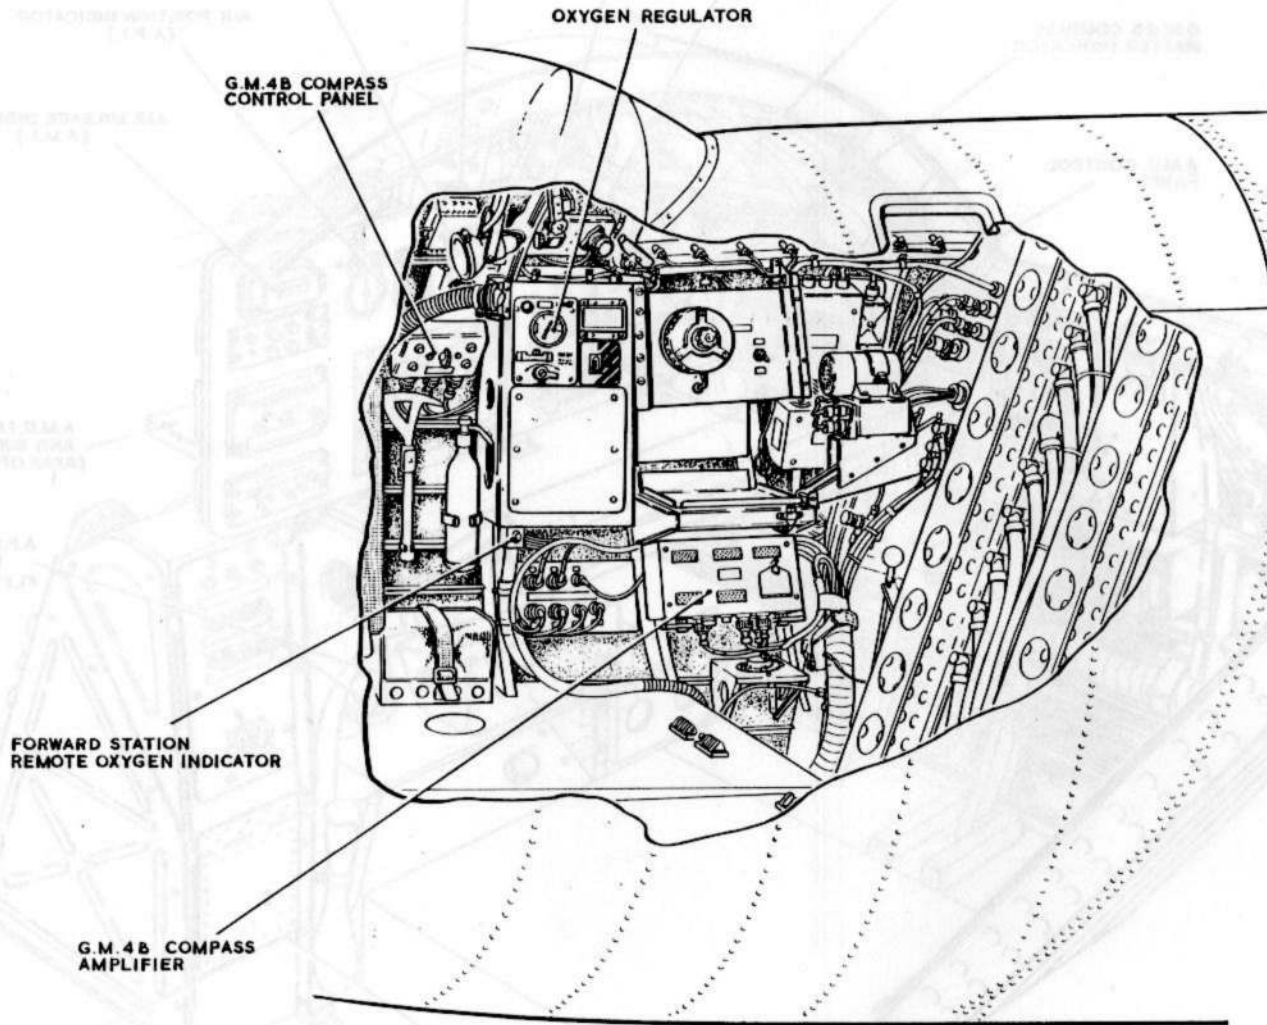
INSTRUMENT INSTALLATION- 2ND NAVIGATOR'S STATION
